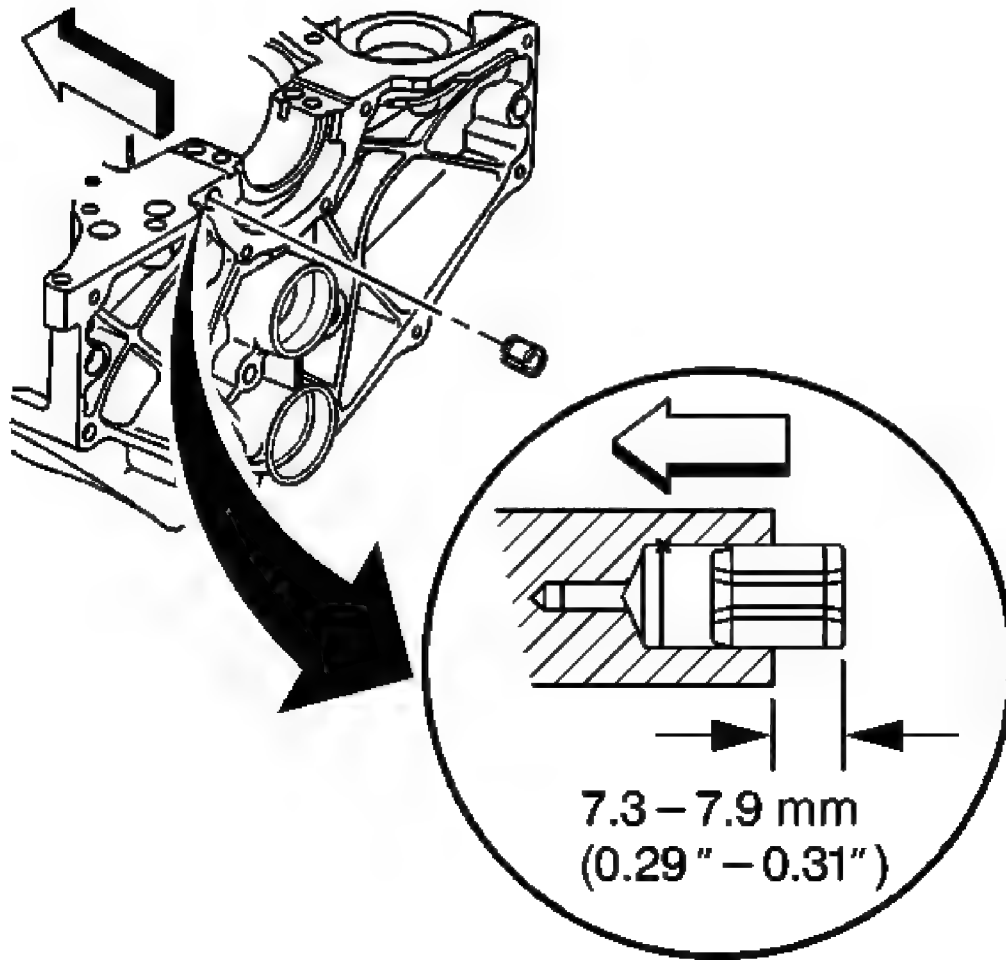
Installing Crankshaft Rear Oil Seal Housing Locator Spring Type S Pin
